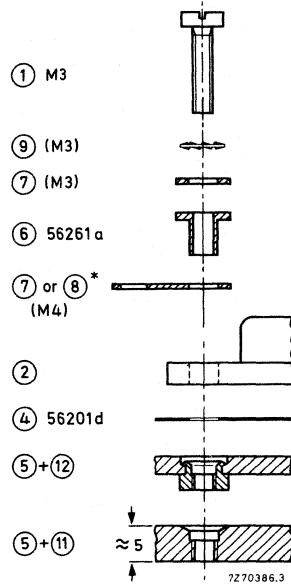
Insulated mounting (500 V) with tapped holes or insert nuts.
